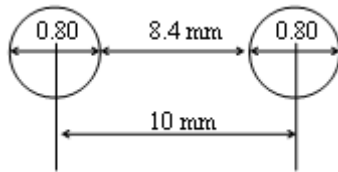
Dimensions [mm] of the holes drilled in the specimen
